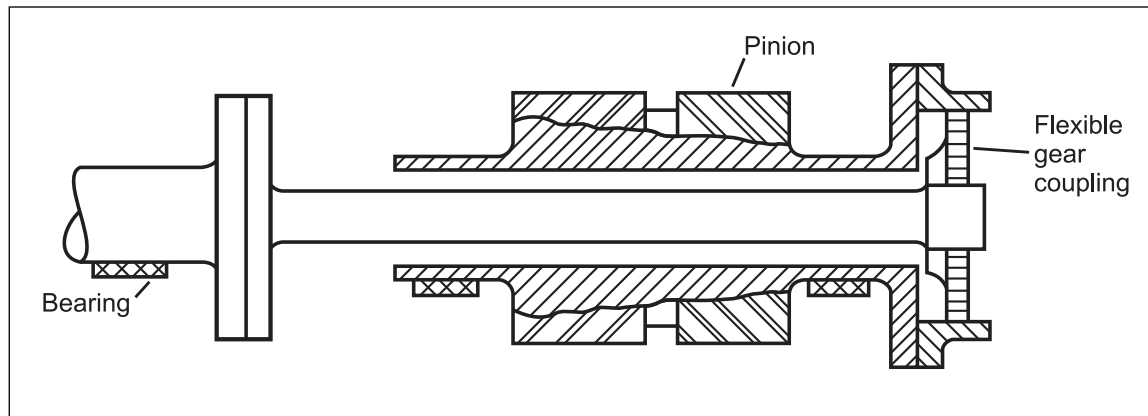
Quill shaft with single engagement coupling with axial flexibility.
